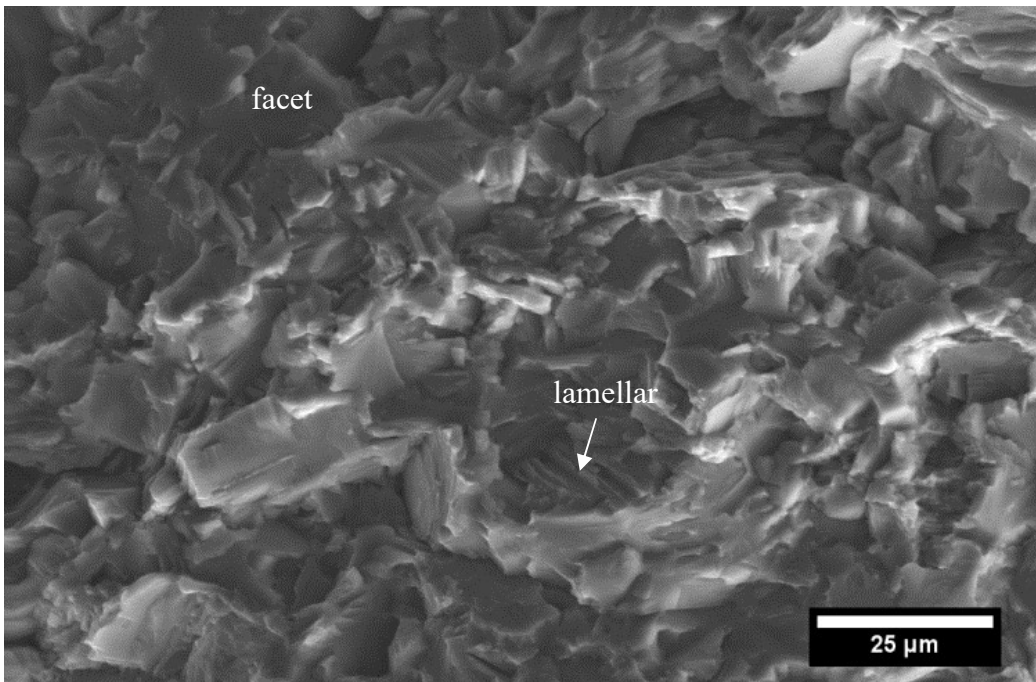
SEM-SE fractography of Sidepress-forged fatigue fracture features in the low  $\Delta K$  regime at  $R = 0.7$ . Crack direction is from top to bottom.
